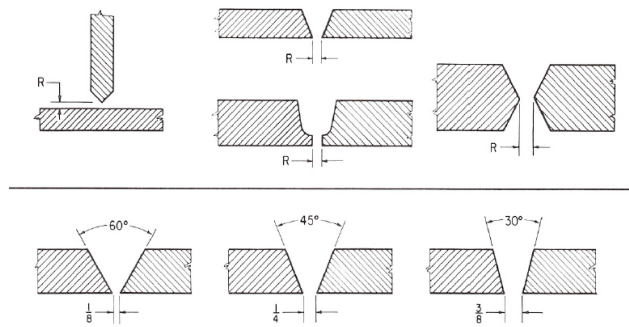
Image credit: "Design of Welded Structures" by Omer Blodgett and the James F. Lincoln Arc Welding Foundation
